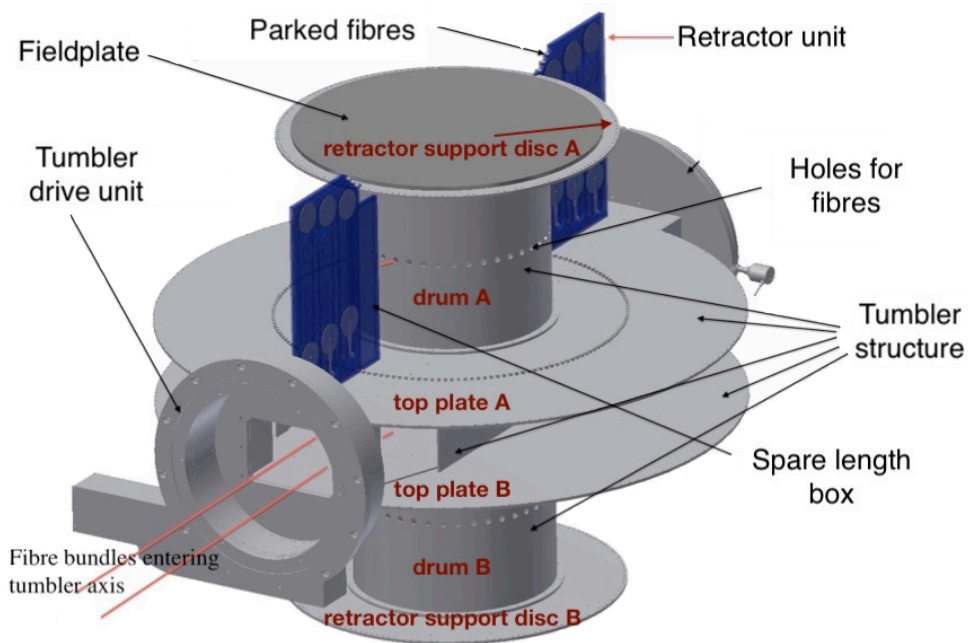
Tumbler assembly. In the build described in this section everything up to both of the retractor support discs is present.
